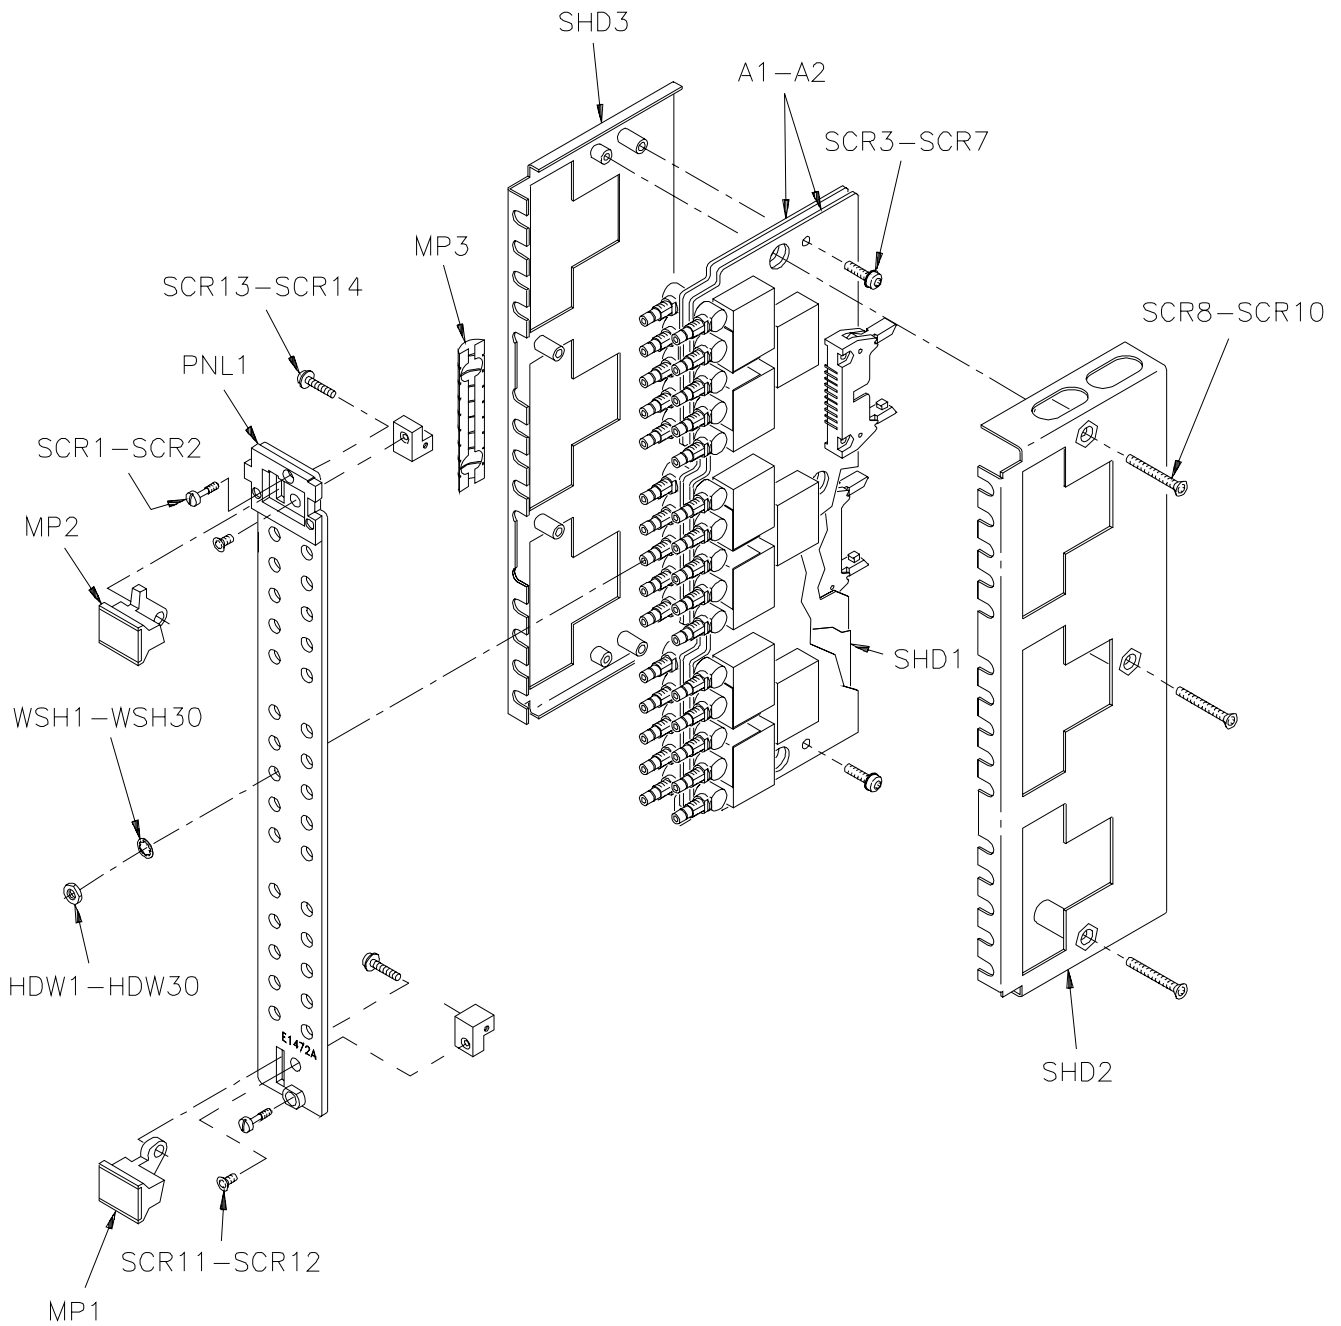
Agilent E1473A & E1475A Replaceable Parts
